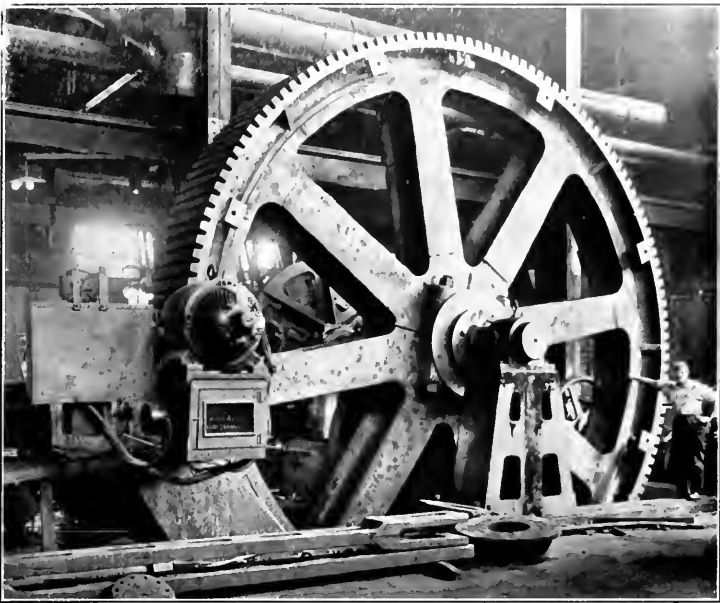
Large Gear and Special Planer used for cutting the Teeth—Outer Sections of Rim were shifted after Teeth were cut to stagger the Teeth as shown in Fig. 1
